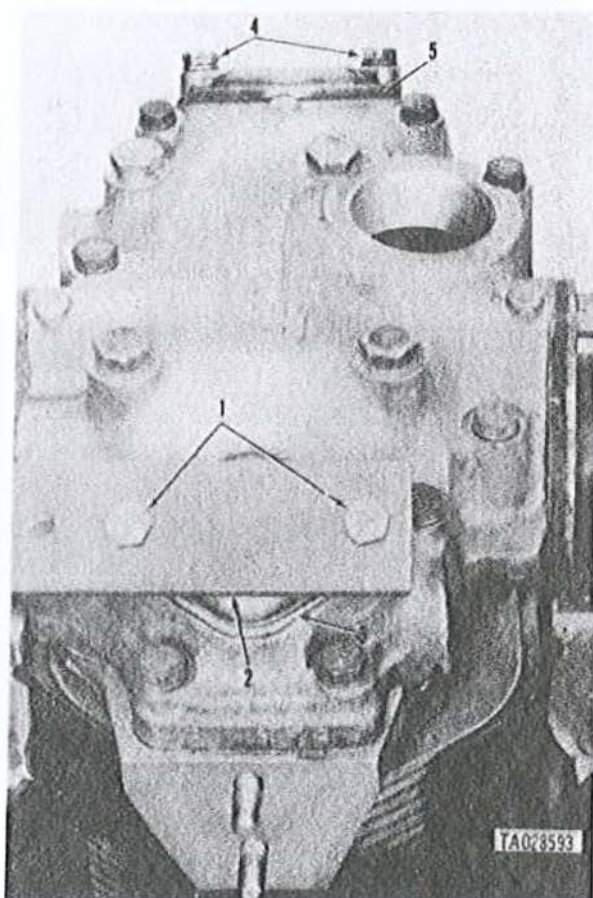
Removing or installing injector nozzle and holder assembly.
